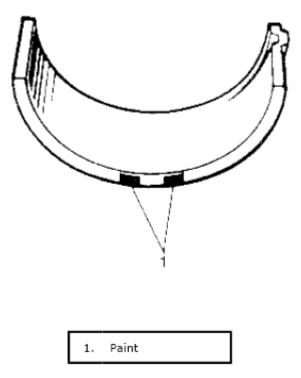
Identifying Crankshaft Main Bearing Mark Location Courtesy of SUZUKI OF AMERICA CORP.
